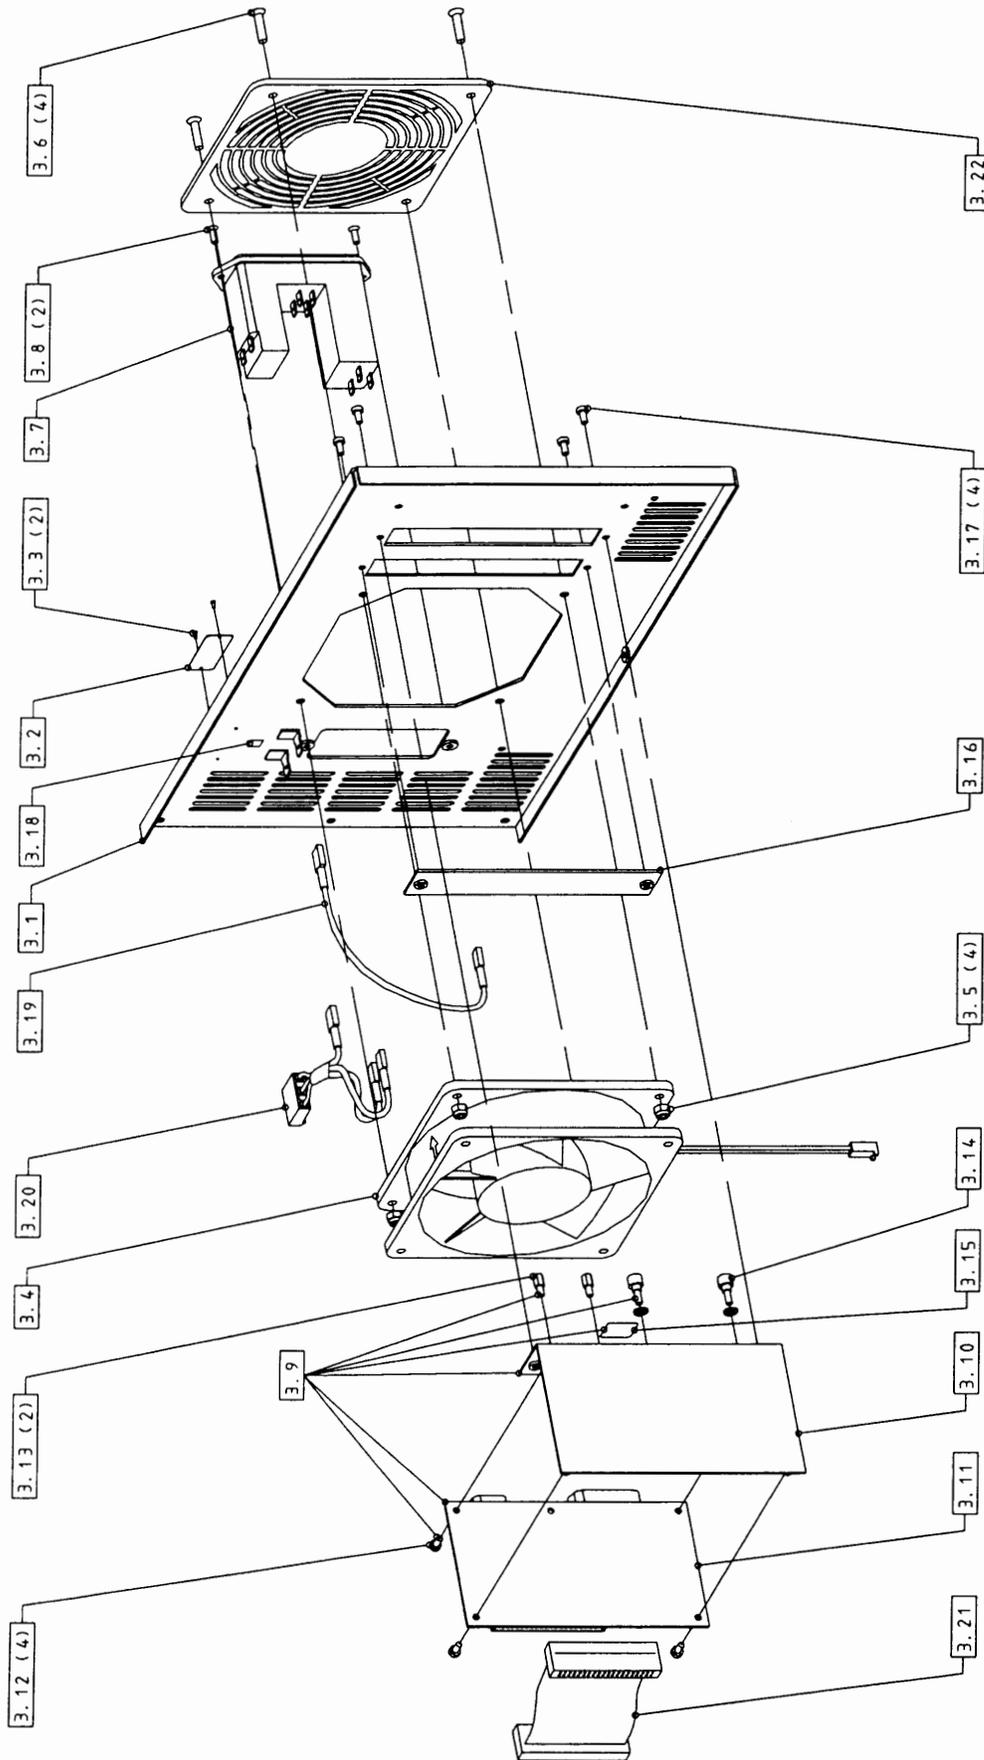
9314A/M/L Rear Panel Exploded View (ECO 1000)
